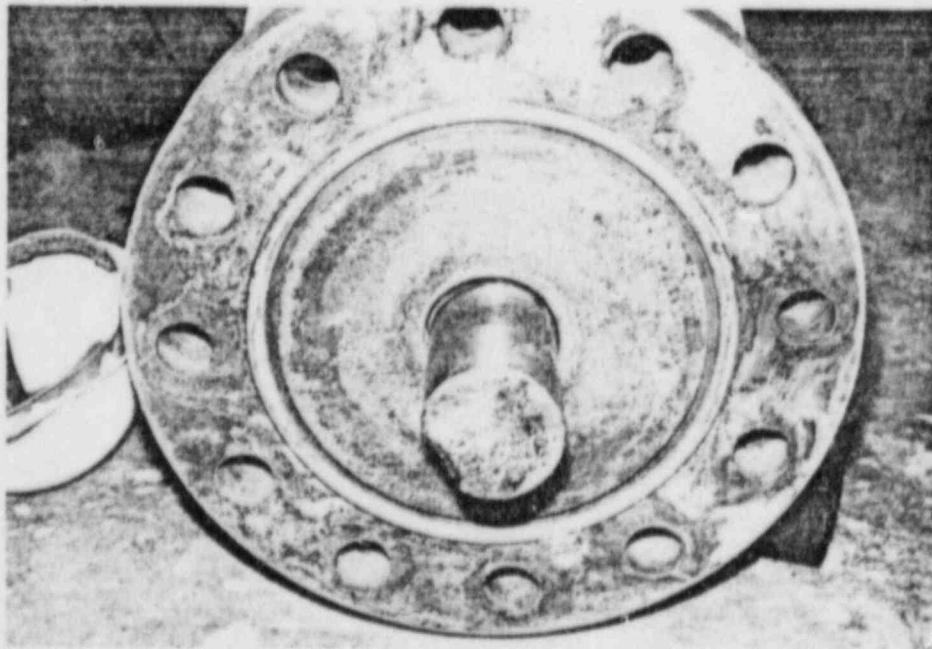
FO10 VALVE DISASSEMBLED SHOWING
